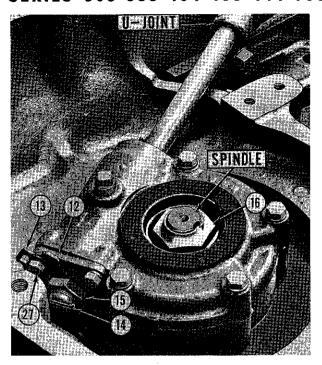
Tricycle type manual steering gear installation. Worm shaft end play is adjusted by screw (14). Steering gear backlash adjuster is shown at (13).
